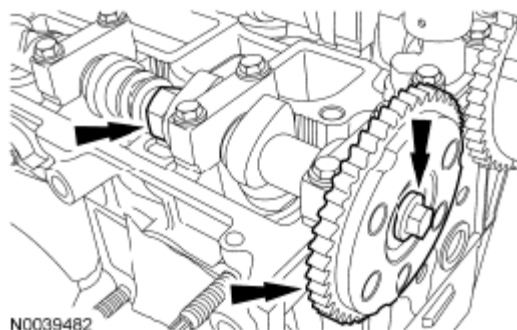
Locating Flats On Camshaft, Bolt & Exhaust Camshaft Sprocket
